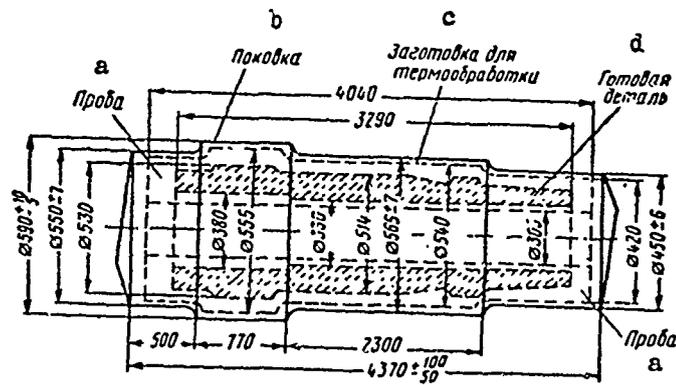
Forging and stock for heat treatment and finished built-up barrel jacket
